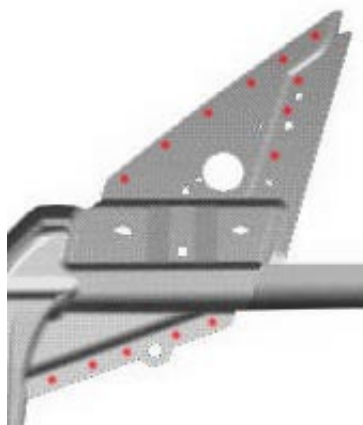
Resistance Spot Welding of the Mirror Flag Outer to Front Door Inner Front
